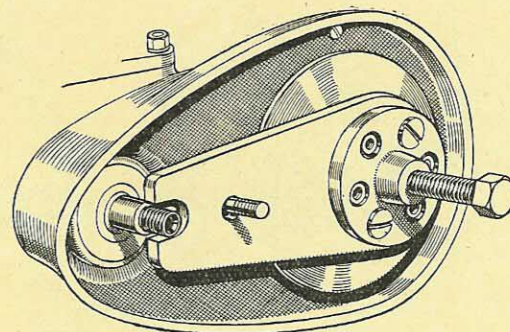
REMOVAL OF CLUTCH CENTRE.
